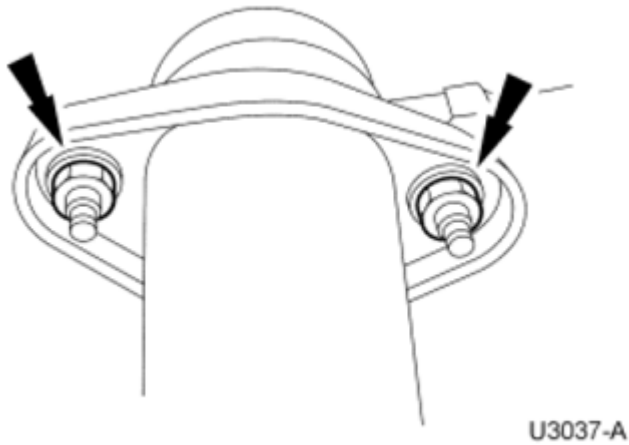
Locating Exhaust Y-Pipe Flange Nuts
